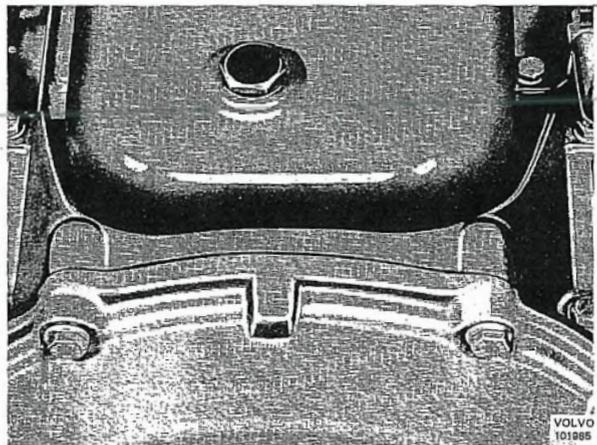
Reinforcing bracket, cylinder block—flywheel housing
